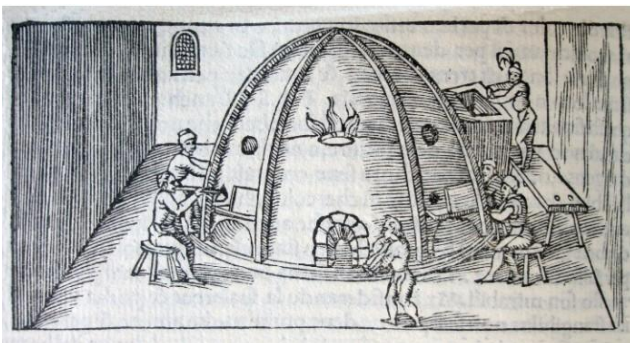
Glass Kiln (Inside a Renaissance Glasshouse, n.d.)
